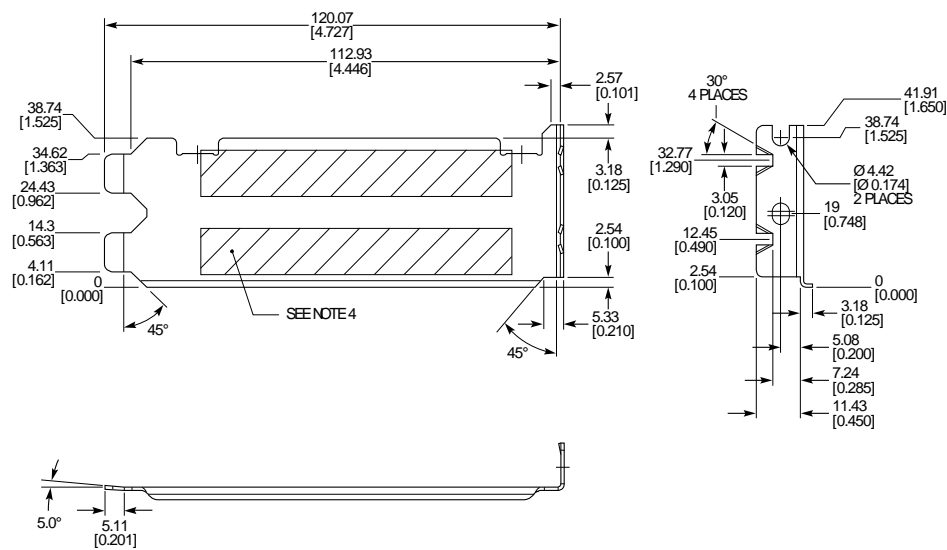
PCI Express TRIPLE-SLOT Add-in Card Dimensional Drawing
